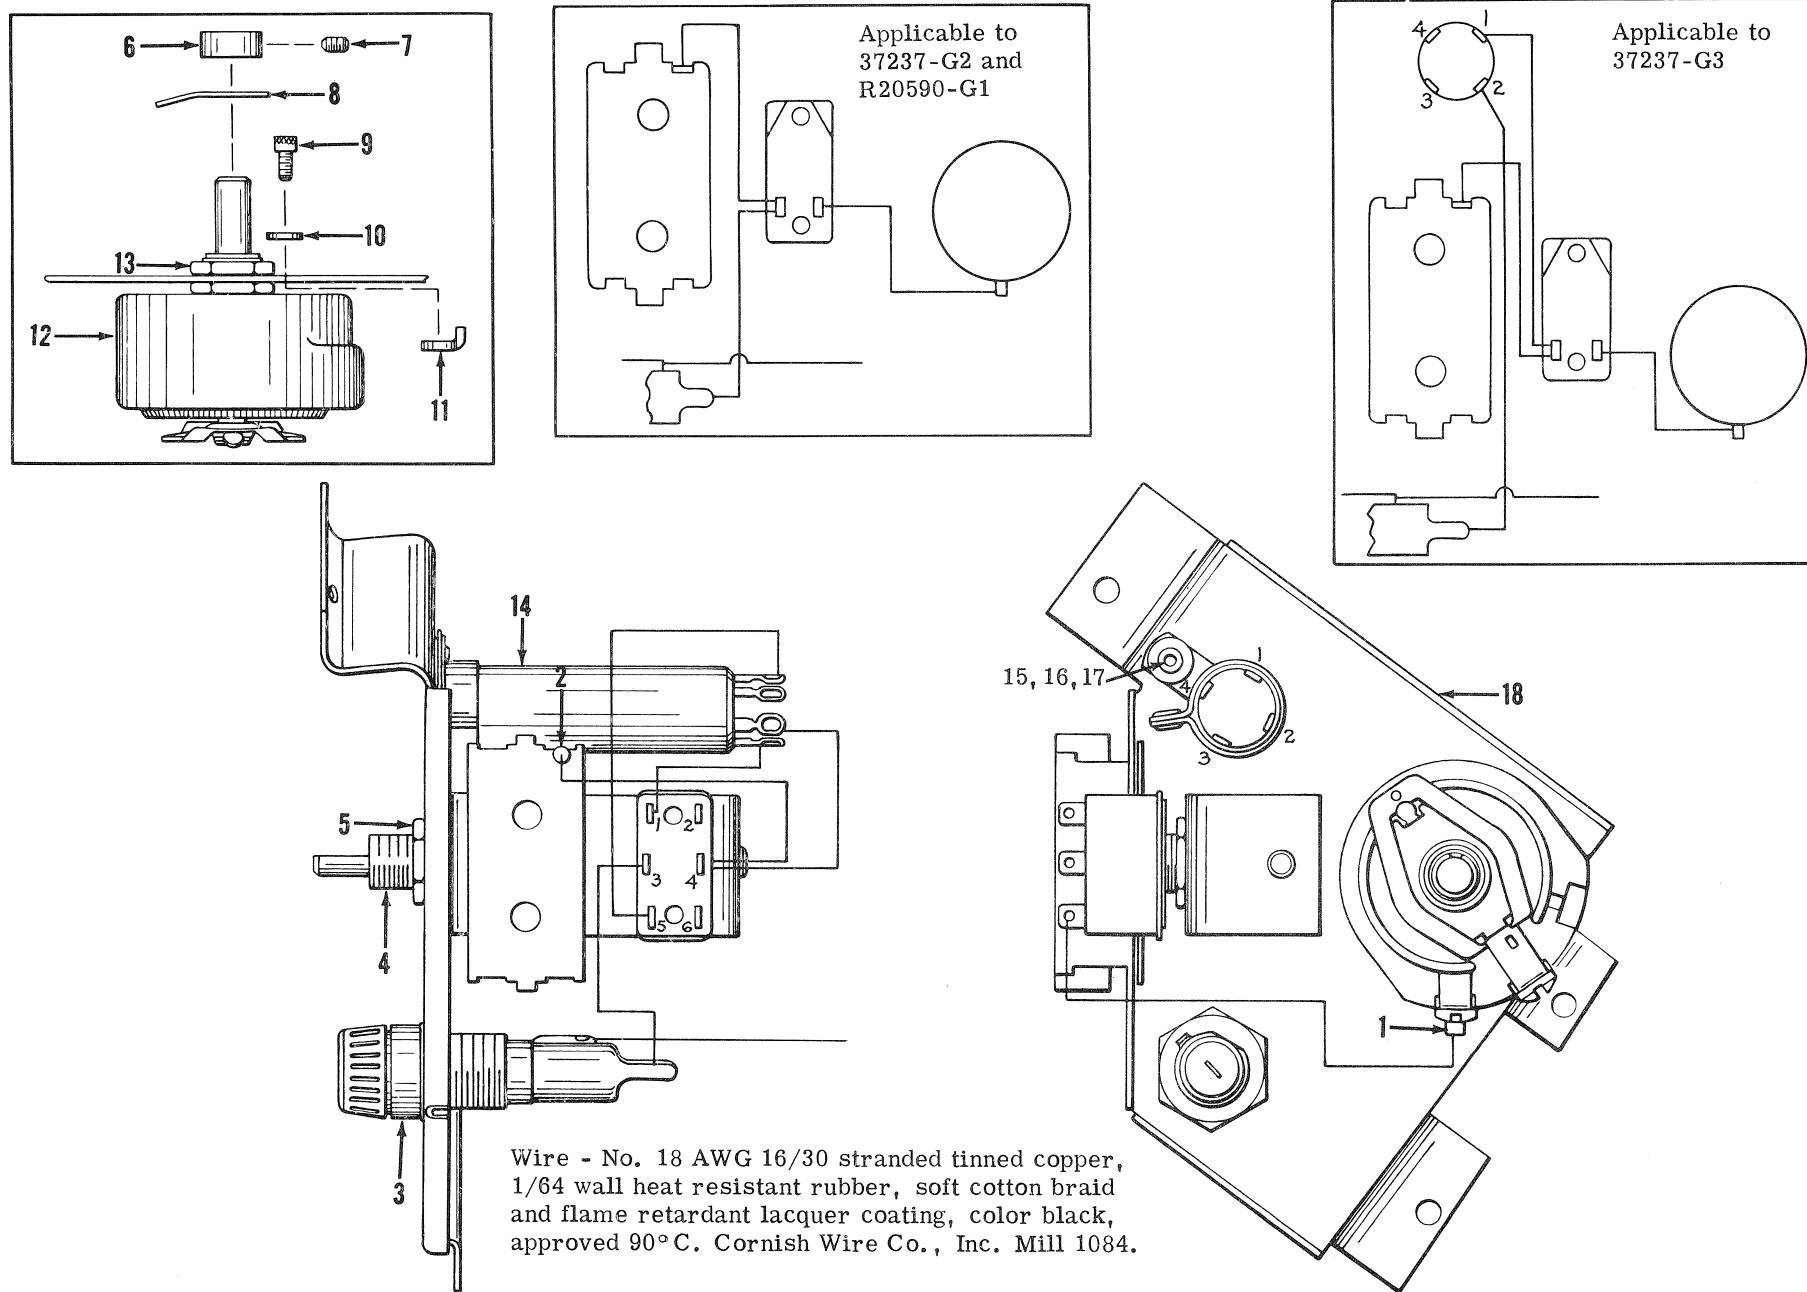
PANEL ASSEMBLY - SUB CONTROL
